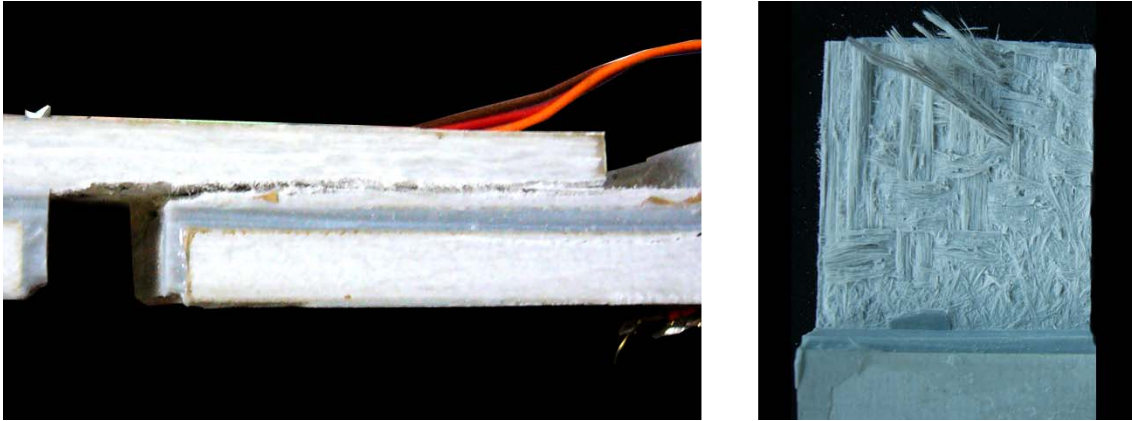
Typical failure mode of SLJ specimens, failure surface shown on the right.
